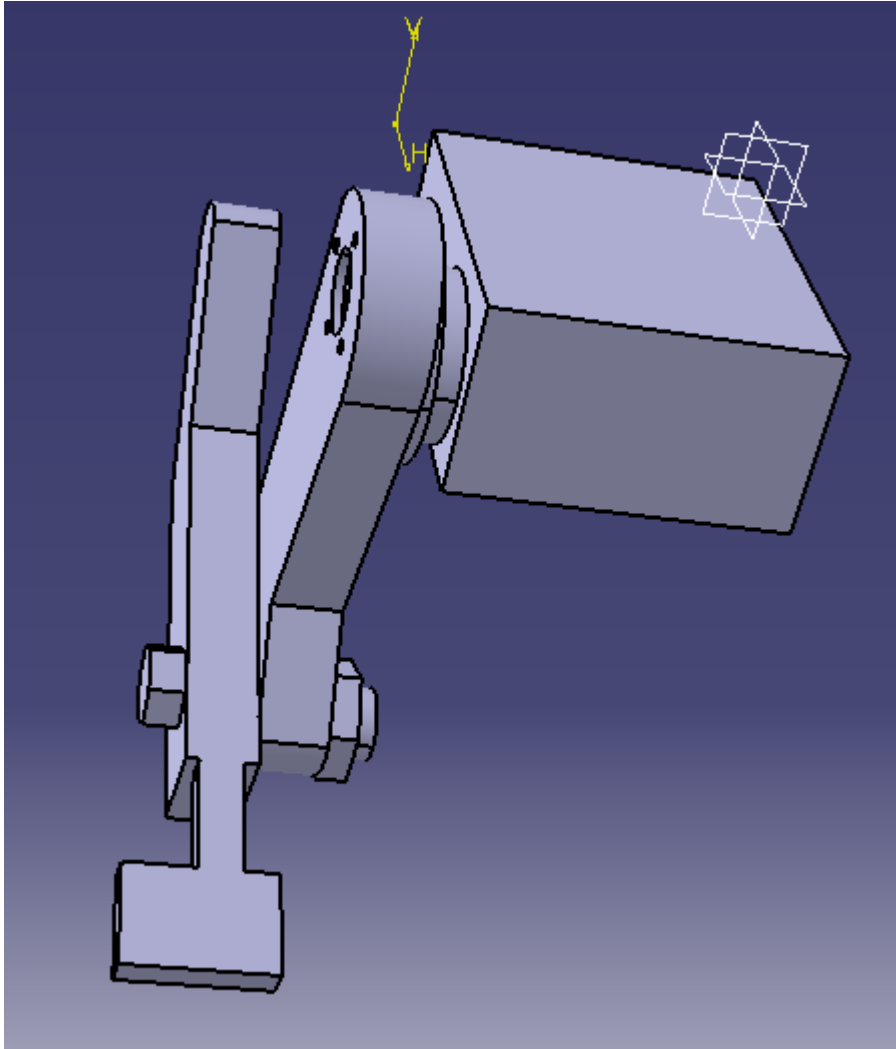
Side view of Brake actuator fitted to the brake pedal with a bolt
